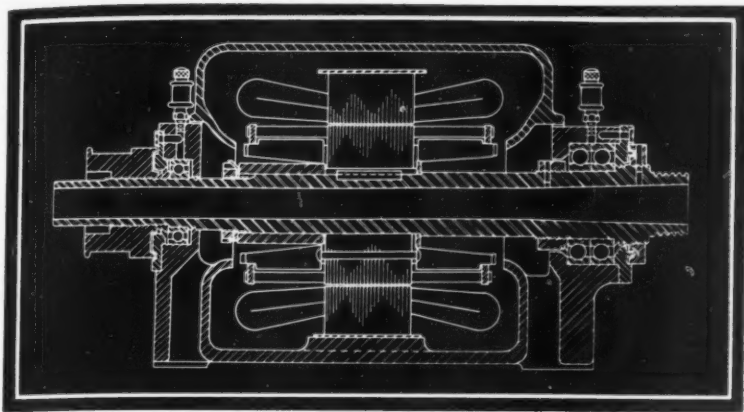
Rolled shell type motor of shaftless construction has motor mounted directly on machine spindle
